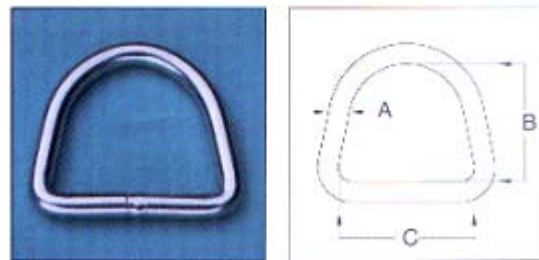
D-rings, 316 stainless steel welded (MMM and Accessories, Inch., 2005)
